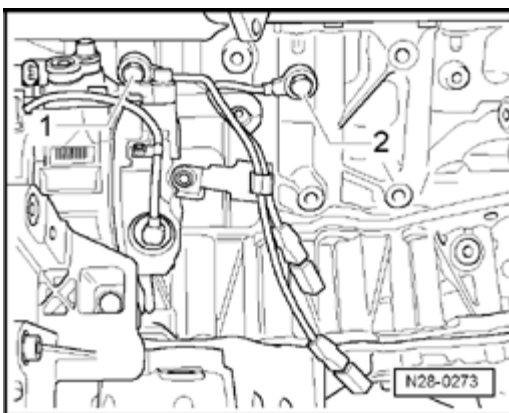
Knock Sensors 3 And 4 For Bank 2
